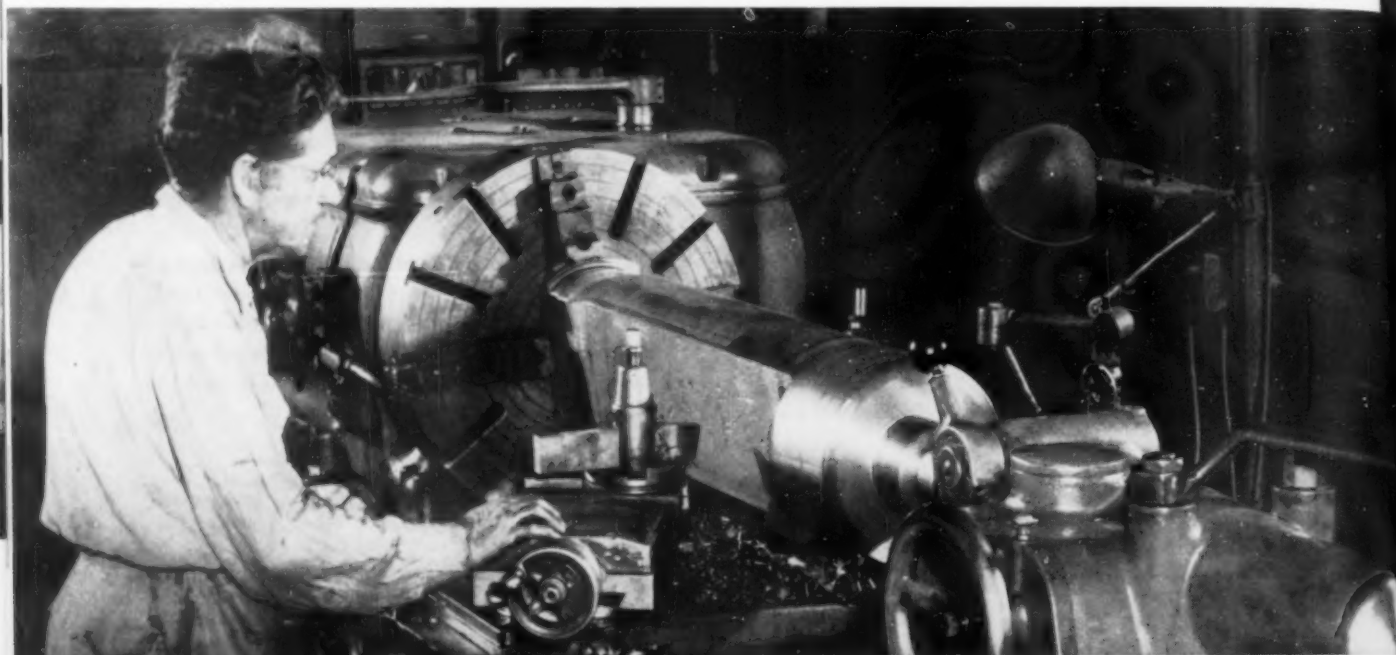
Because of the reduced amount of machining required to produce it, the top spin block is preferred. It is chucked instead of mounted on a faceplate.
